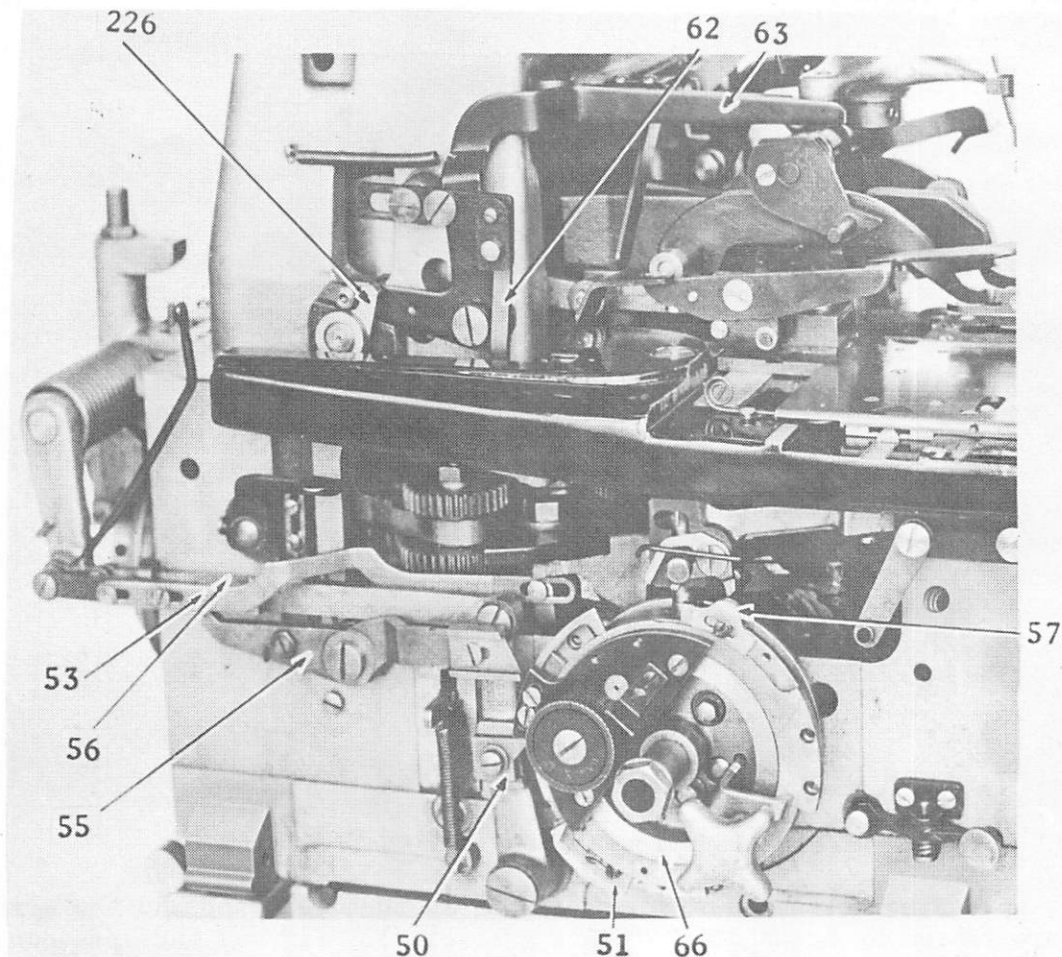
View of Pattern Wheel and Sewing Mechanism
